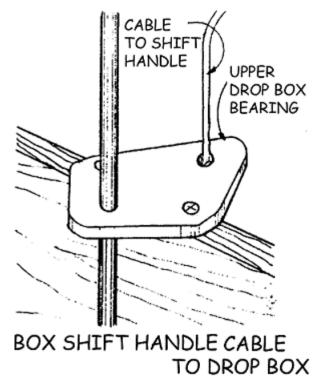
Box-Shift-Handle-to-Drop-Box Cable Attachment
